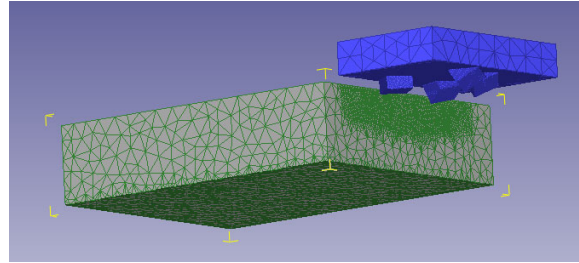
Finite element model of the virtual grinding wheel and workpiece
